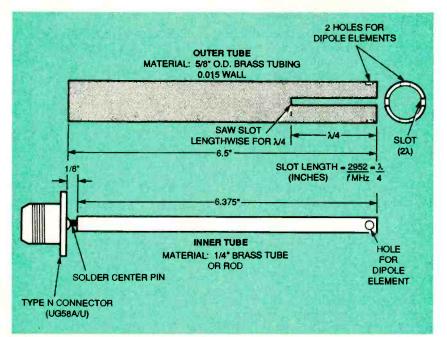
PRE-ASSEMBLY DETAILS of the feedline/balun tubes. For 400 to 470-MHz operation of the corner-reflector antenna the outer tube length should be increased to 14 inches; the inner tube, 13.785 inches.
